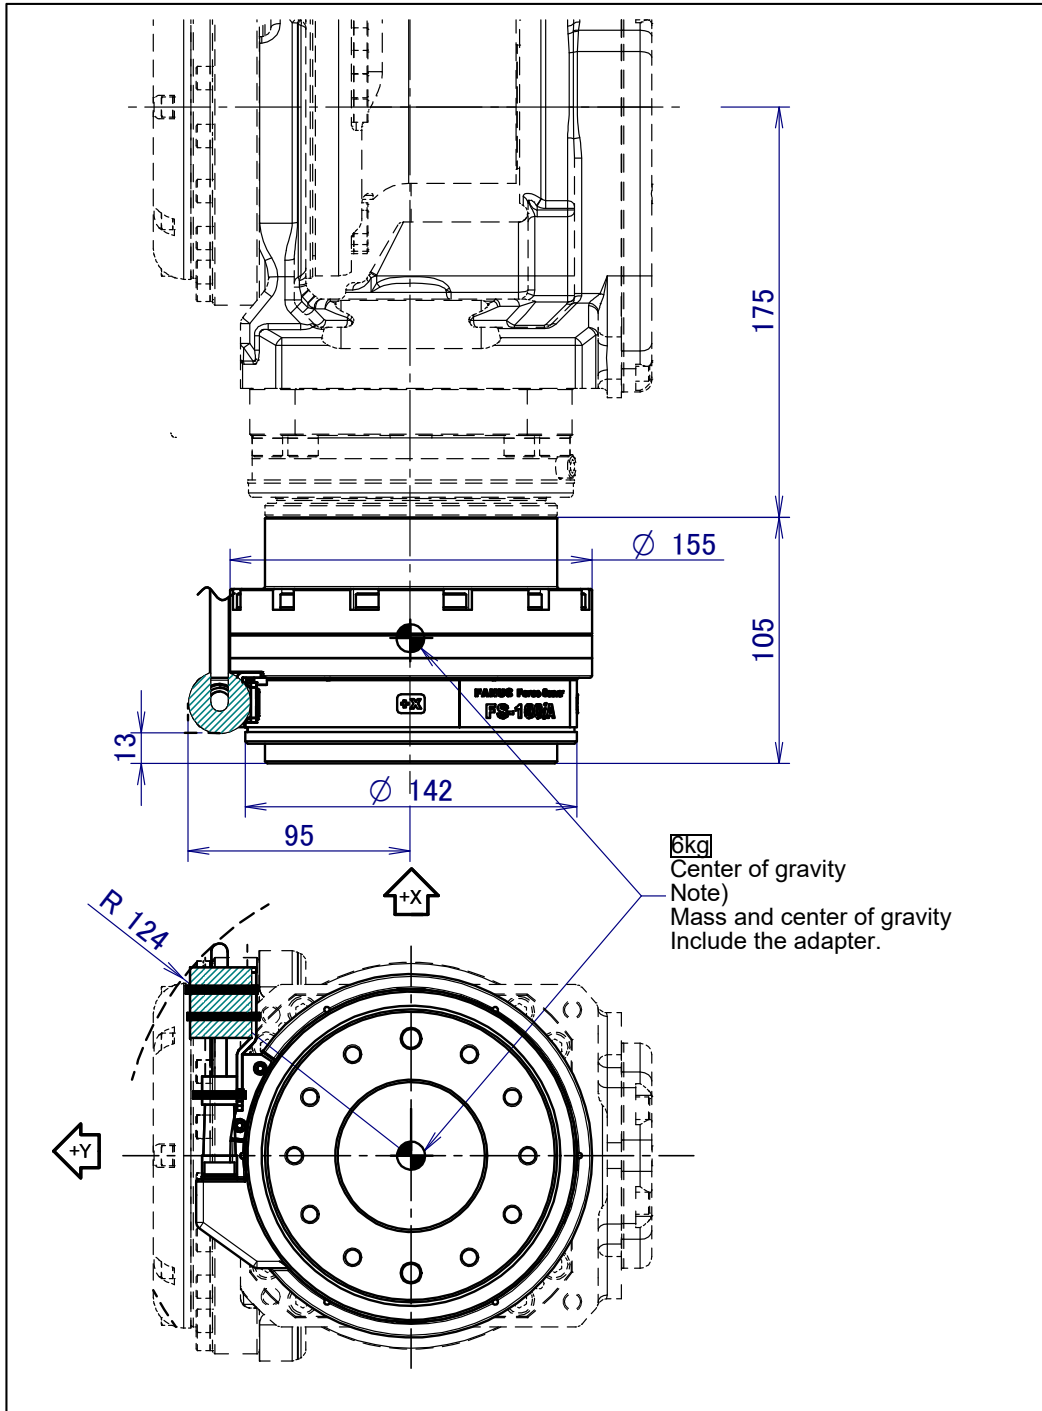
(f) External dimensions of the force sensor head
